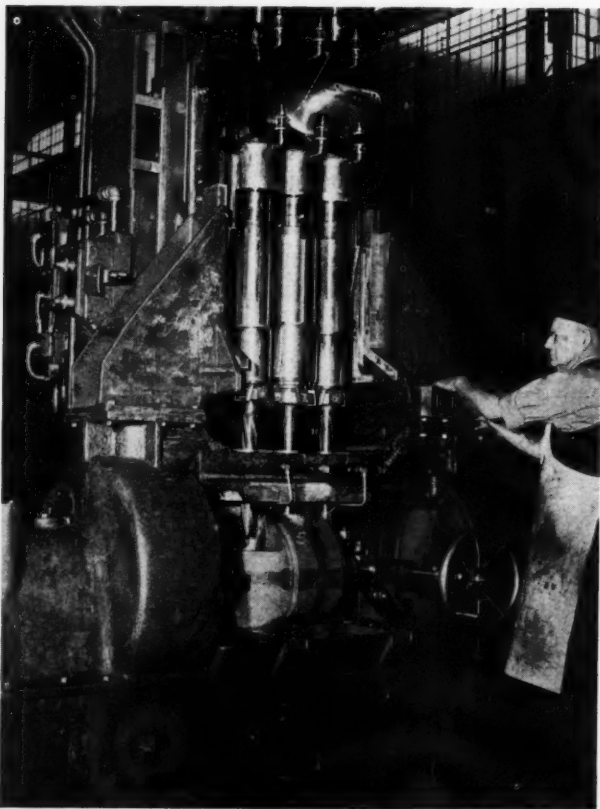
Four-spindle boring machine has been redesigned to a three-spindle machine for boring holes in tank gun cradles
